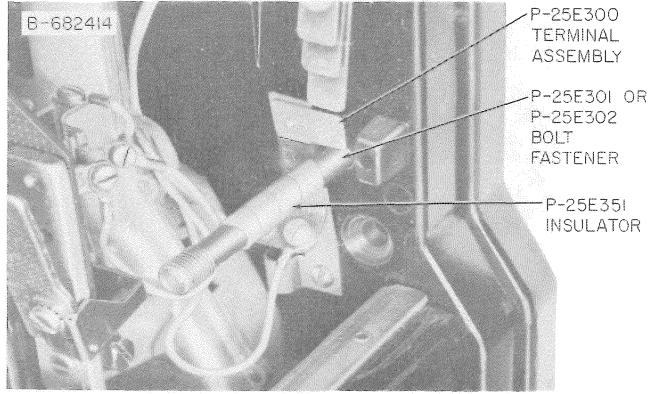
Terminal Assembly, Insulator, and Bolt Fastener
